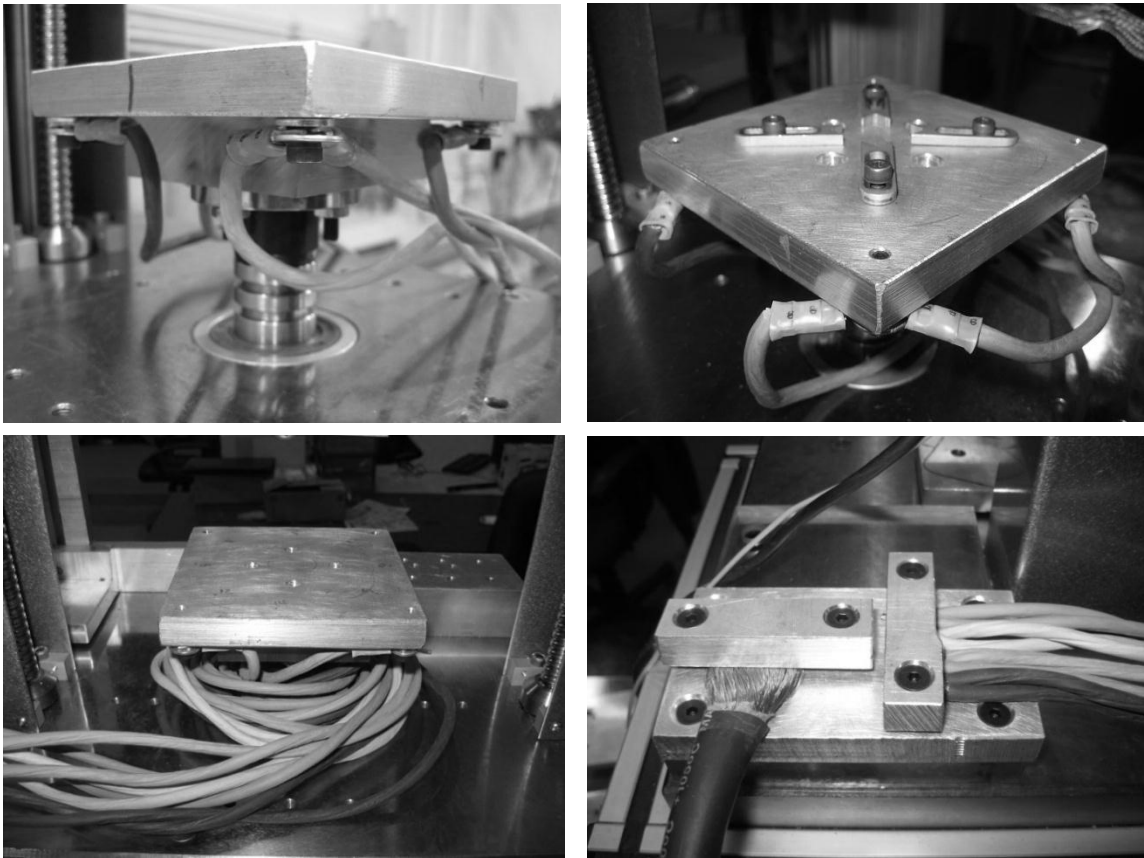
Second design concept for attaching lower welding cable to tribometer.
